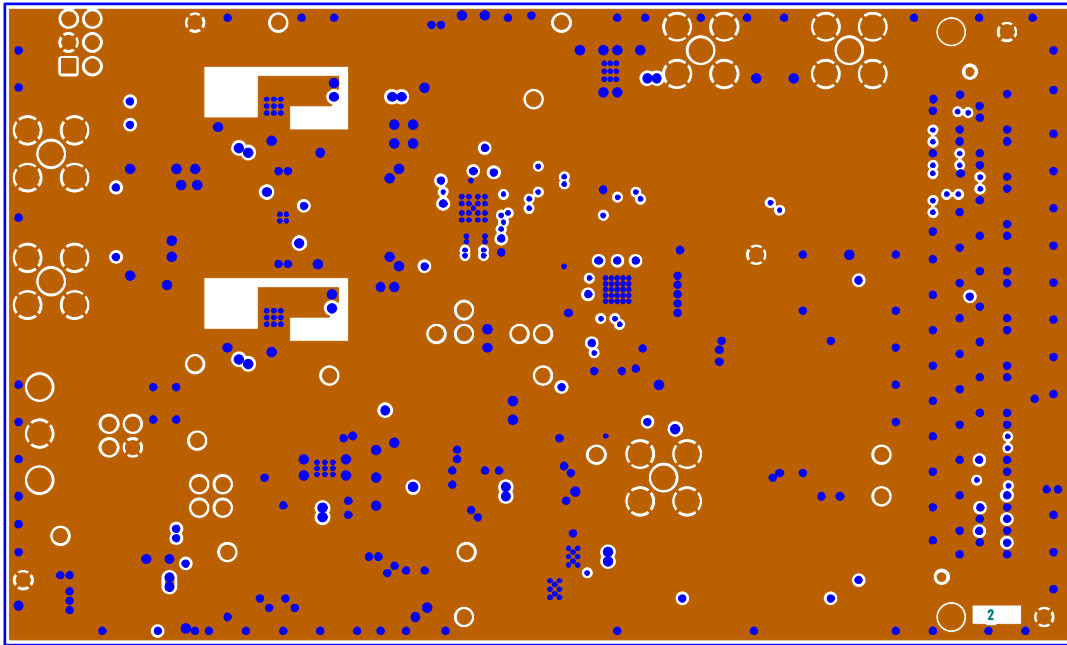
Evaluation Board Silkscreen—Bottom Assembly
